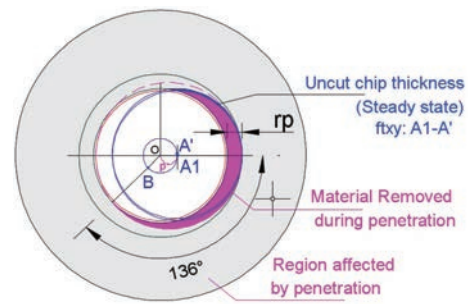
Analysis of penetration on thread milling (M2 configuration)
